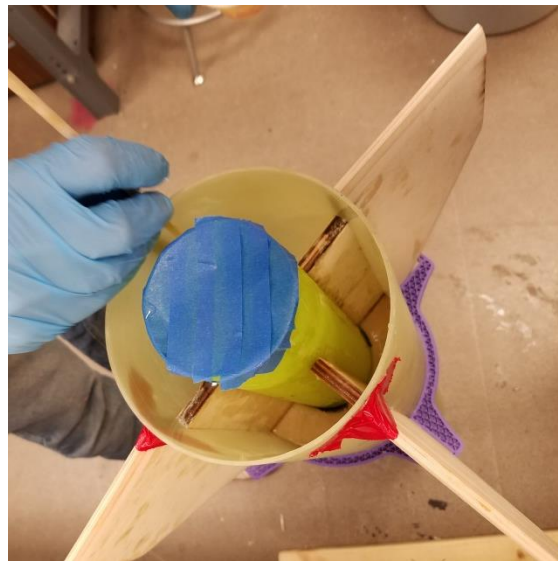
Aft. view of the fin can prior to final centering ring being installed
